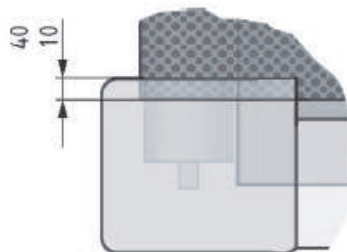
Example of a rear roller guard (min. 10 mm and max. 40 mm)
